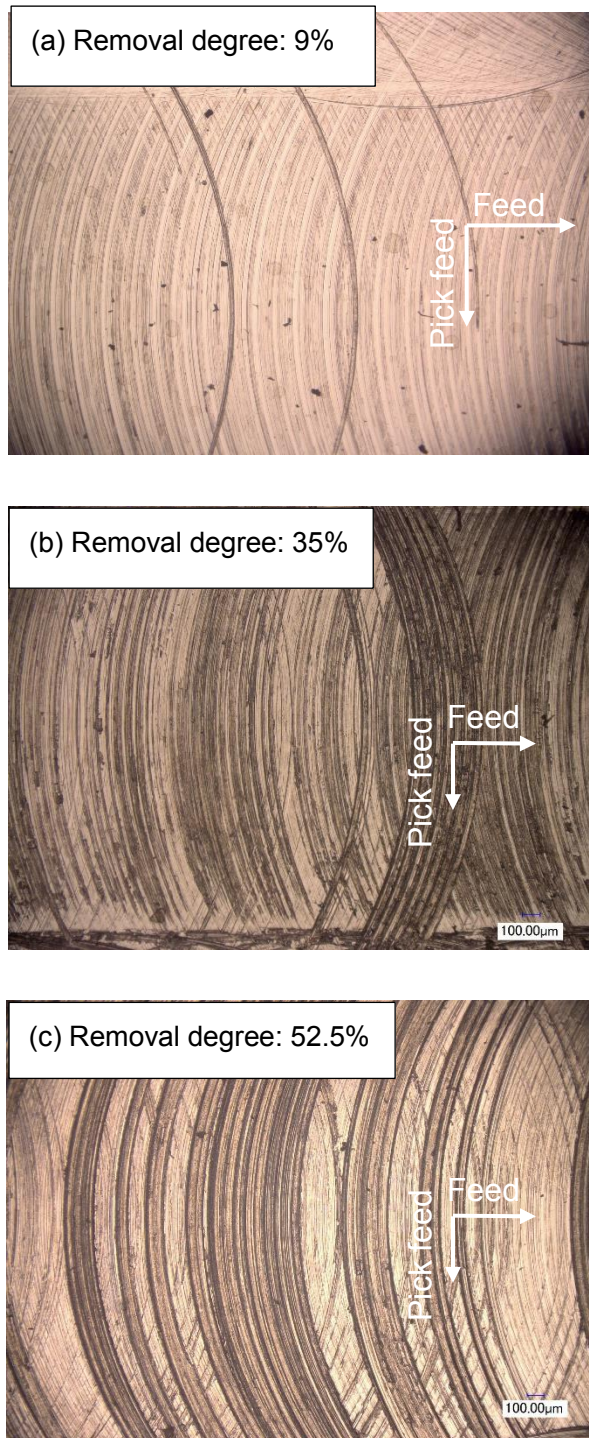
Images of machined surface using square end mill at different removal degree.
